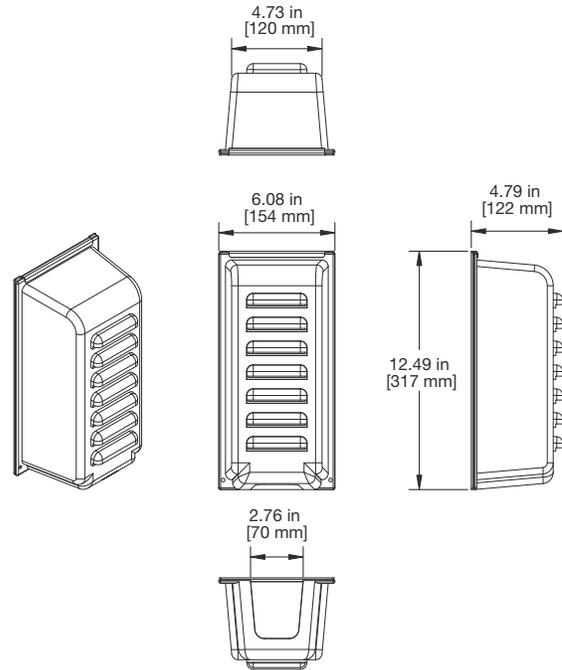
Vertical Rain Hood Dimensions: Upper Rain Hood Assembly (Right)
